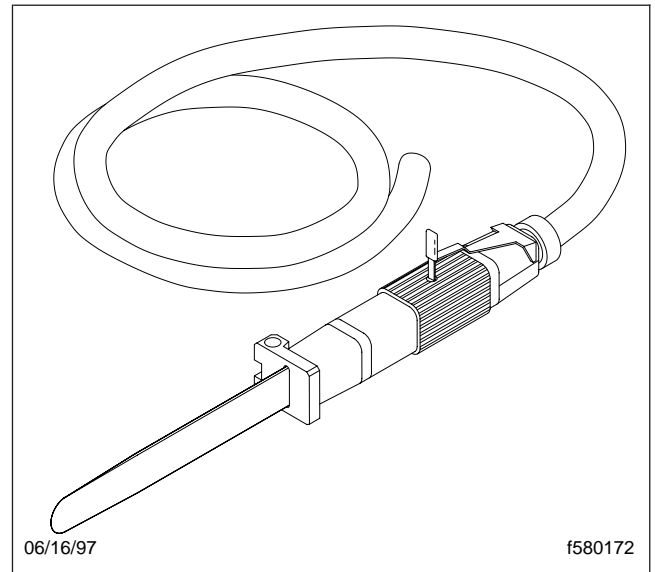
, BTB Pneumatic Cutting Tool (J-43029)
